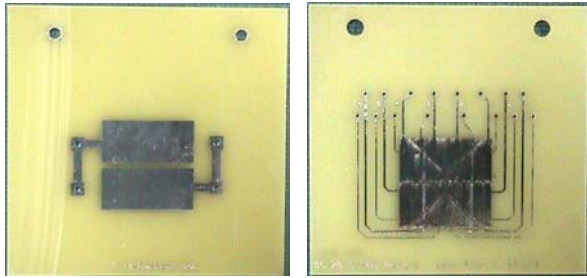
1-Inch Pad Test Boards for 2 and 8-Lead Devices
